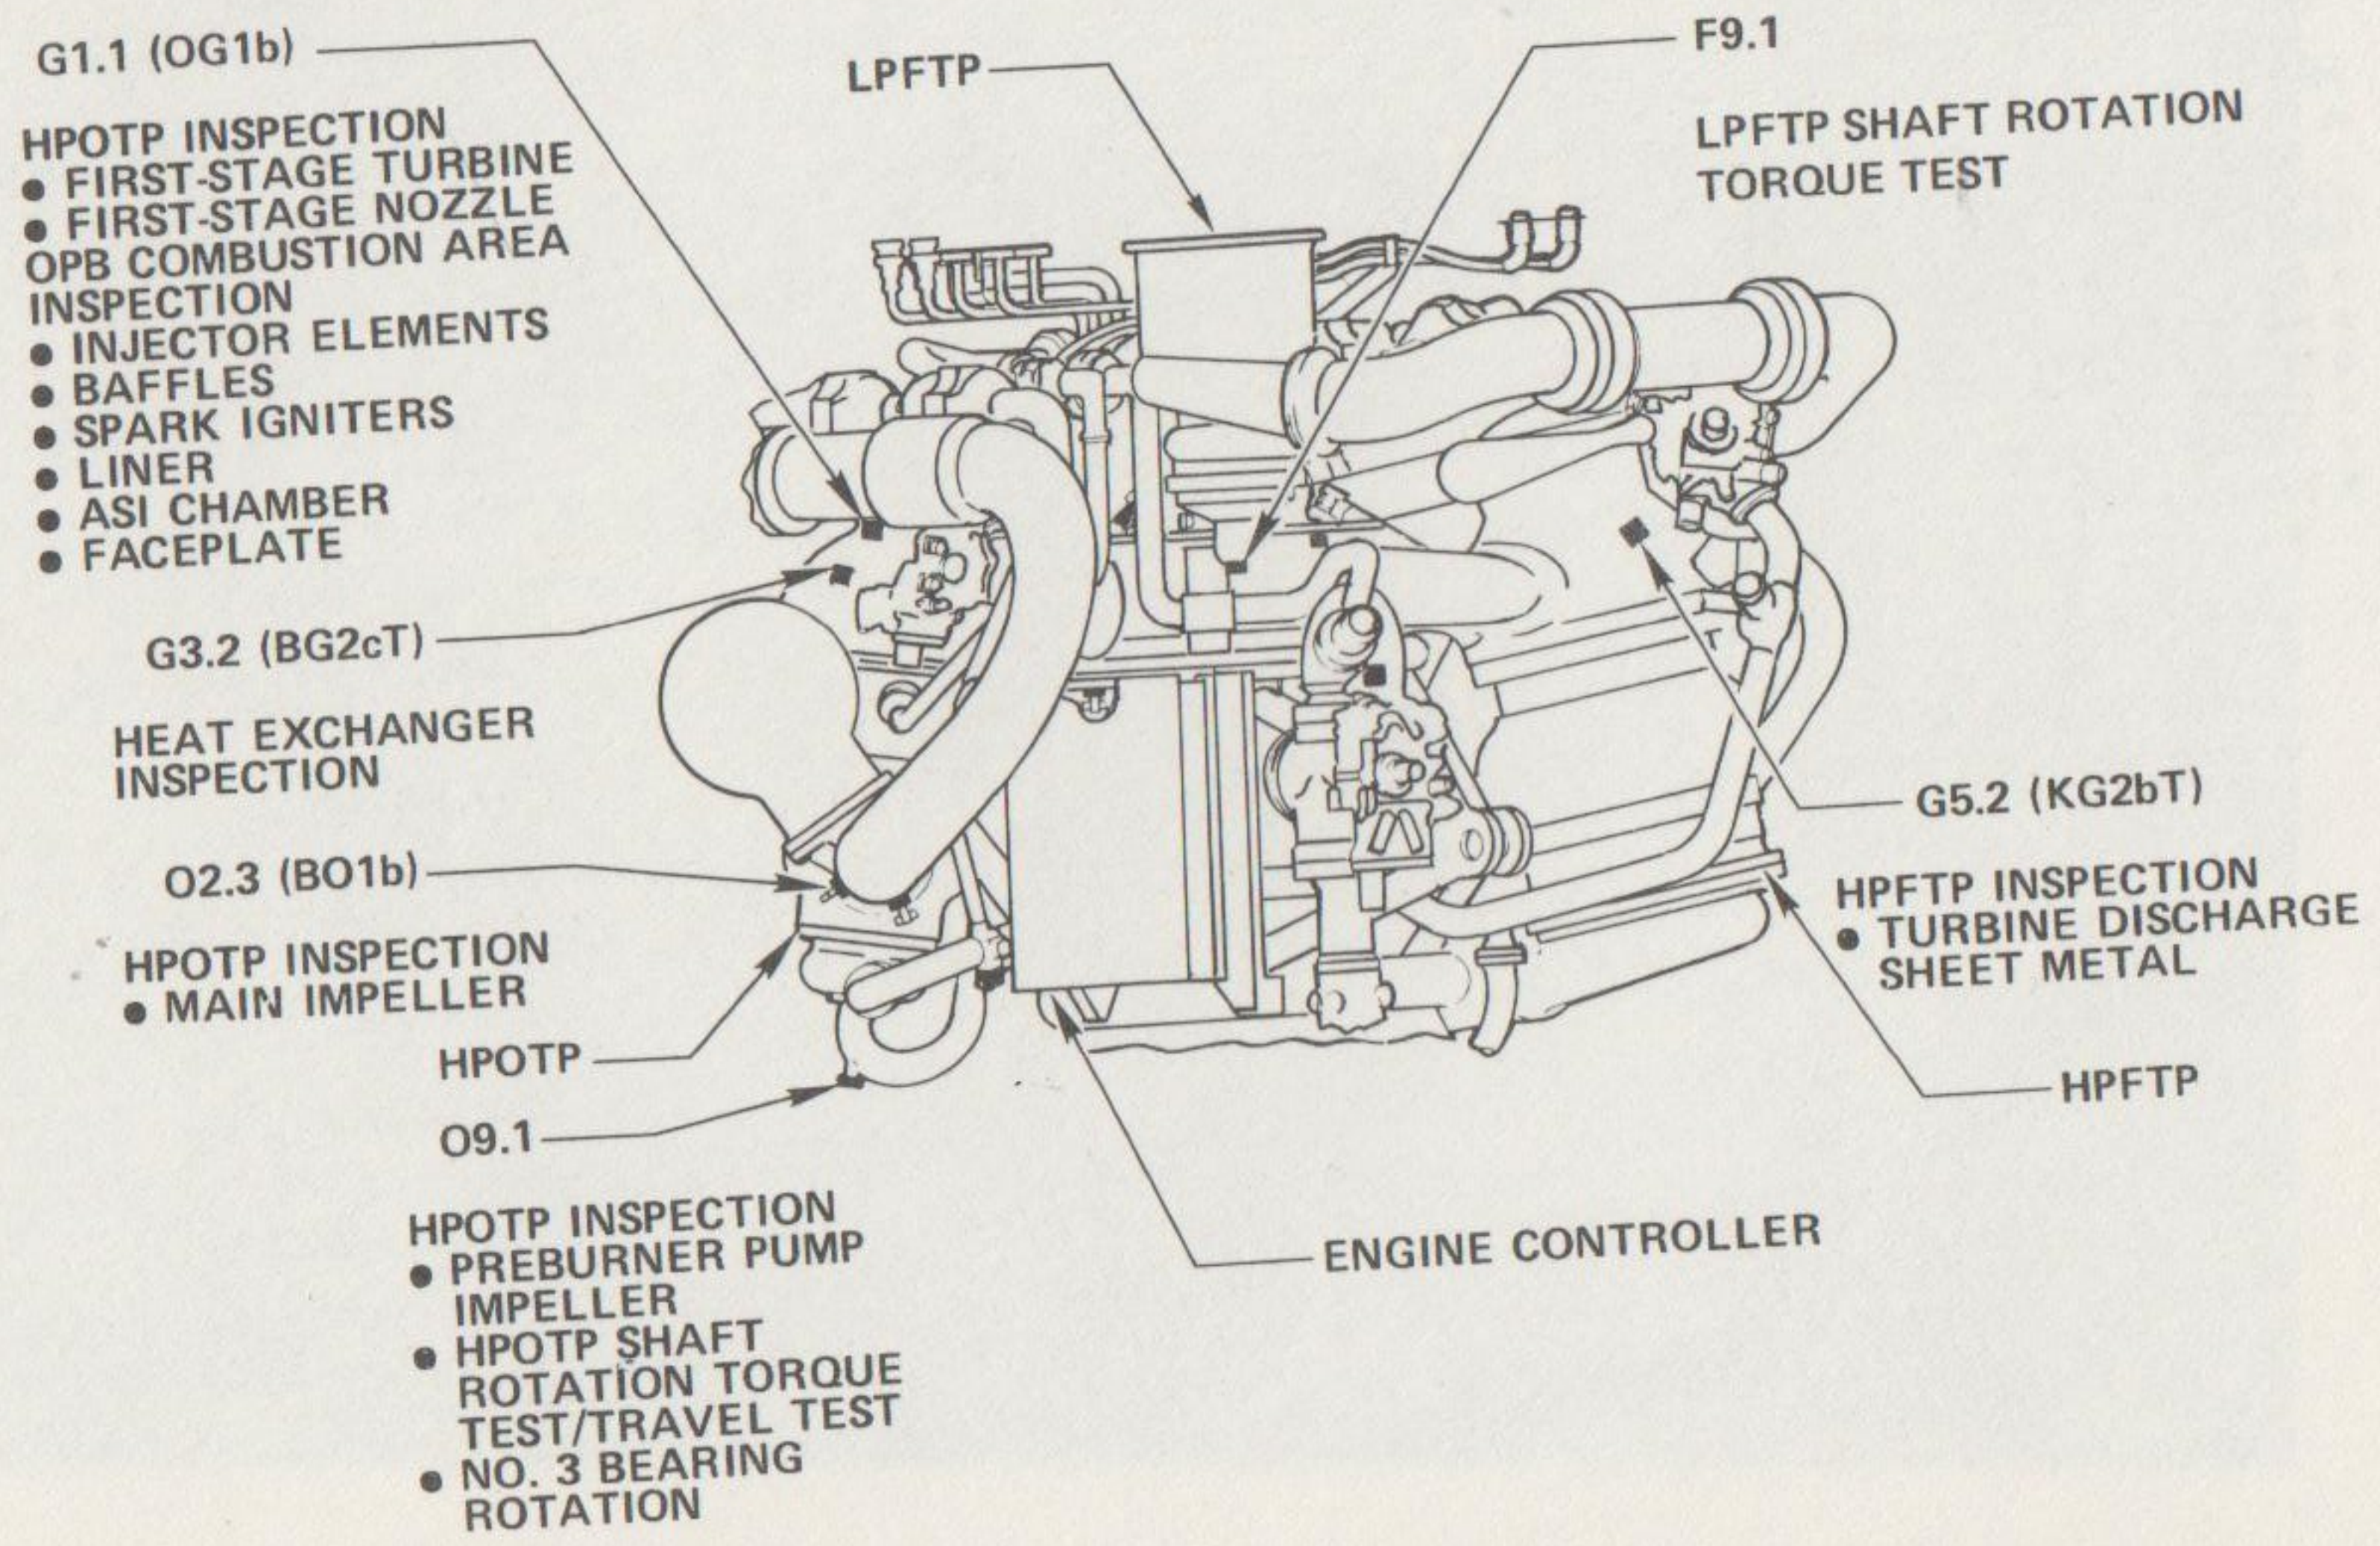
INTERNAL INSPECTION AND SHAFT ROTATION ACCESS - LPFTP SIDE OF ENGINE
